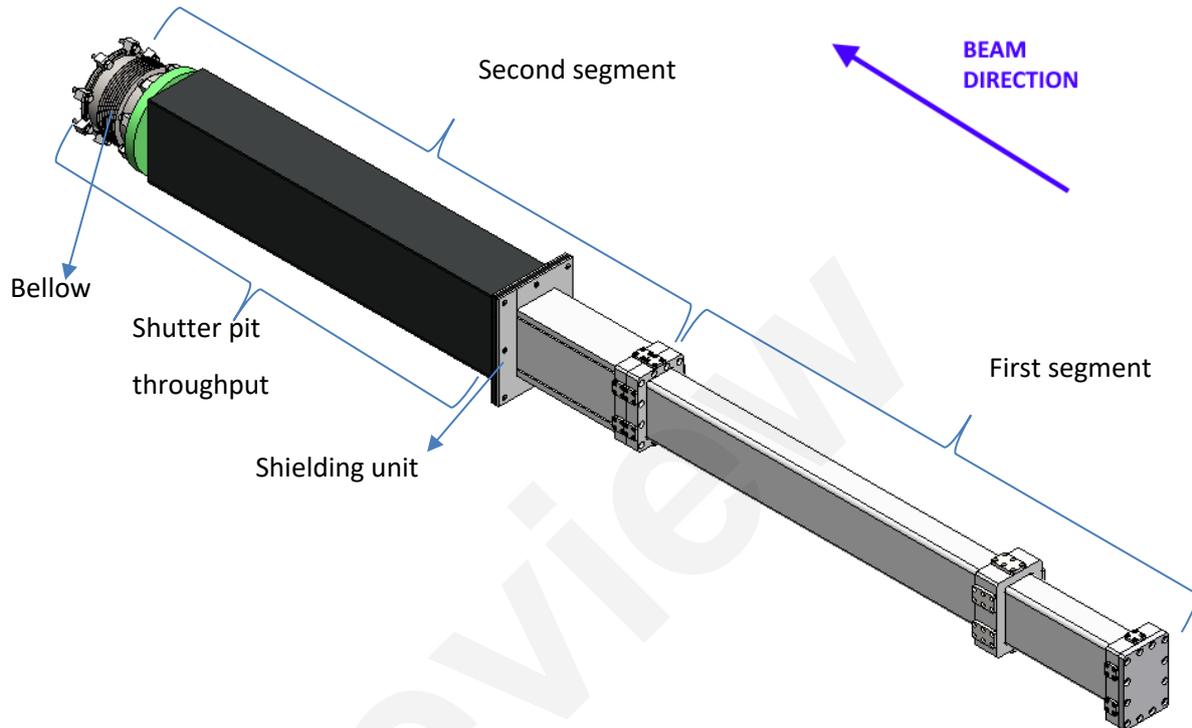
Assembly of vacuum housing for W02-14 sections of the neutron guide.
